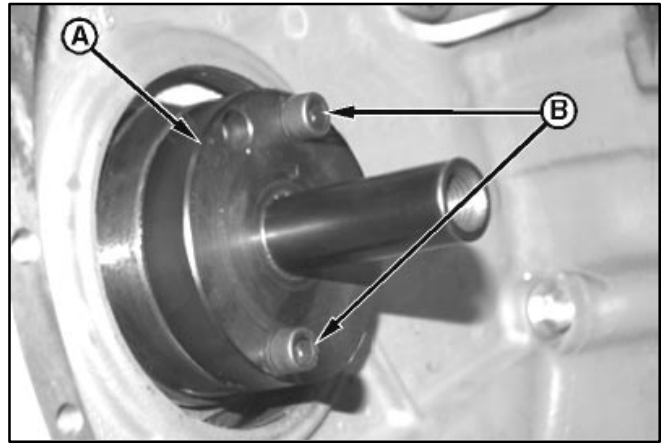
REAR OIL SEAL INSTALLER TOOL
